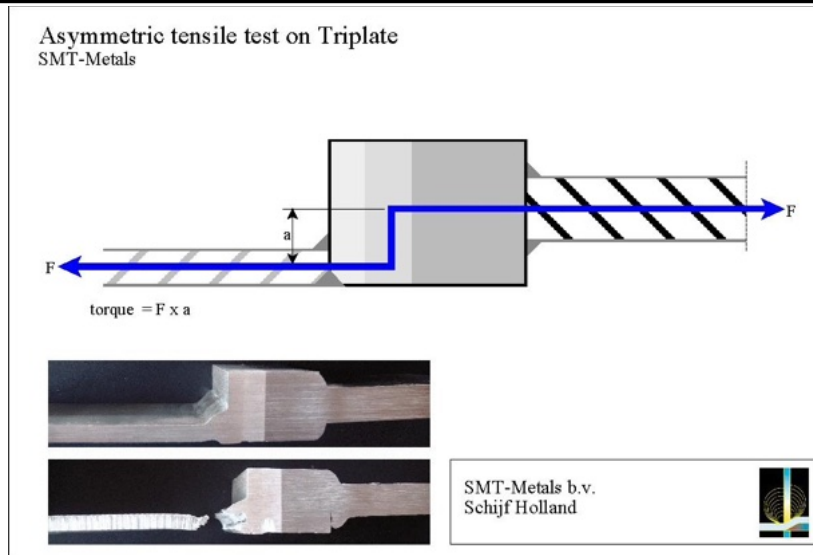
Asymmetric tensile test on Triplate® (SMT-Metals). The diagram shows the eccentric load path (torque = $F \times a$). The lower photos show specimens after testing — fracture occurred in the aluminium zone, not at the bond interface.
